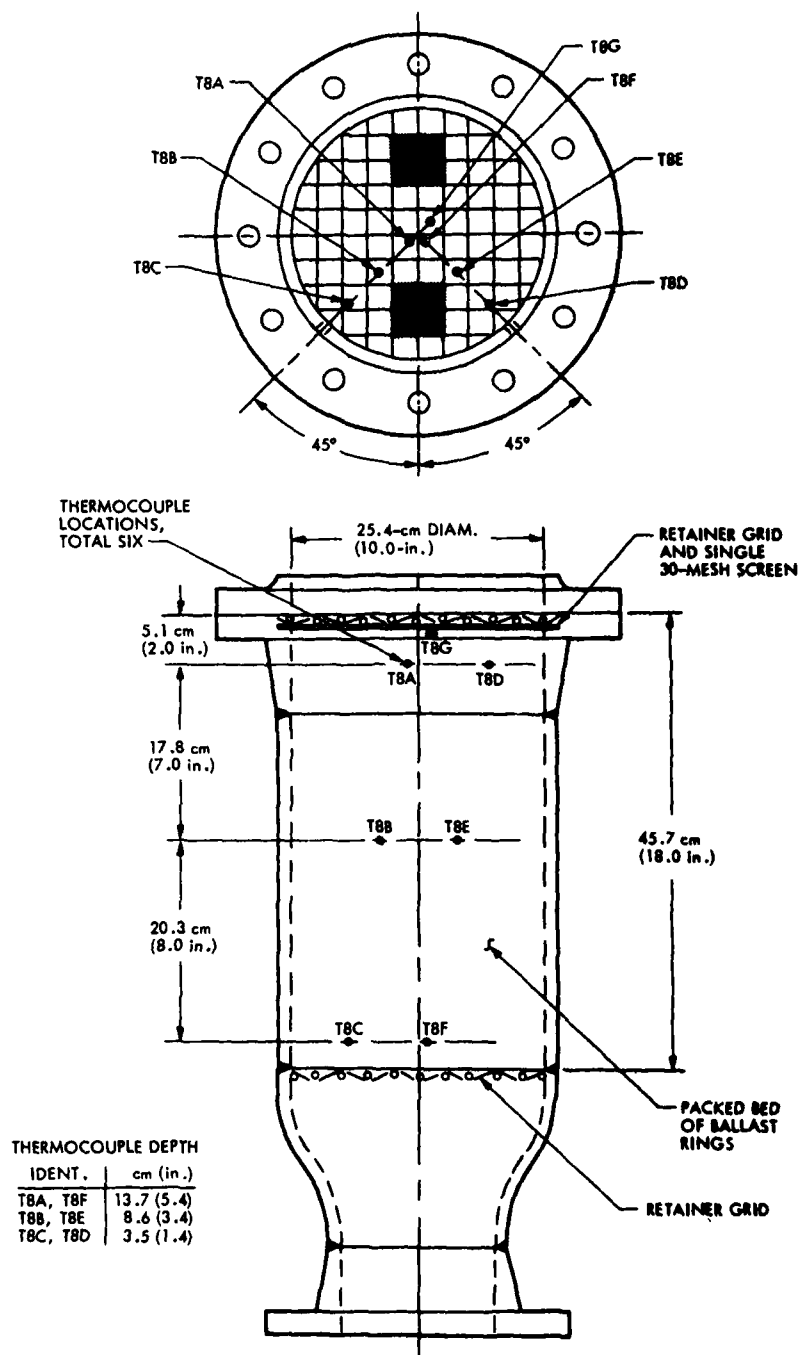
Packed Bed of Aluminum Ballast Rings with Single 30-Mesh Screen Arrester Test Assembly Schematic Drawing
